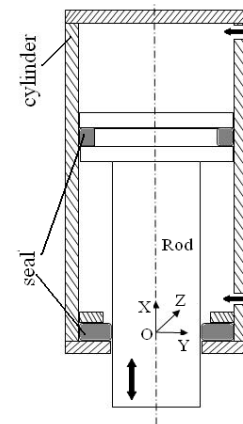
Sketch of the piston pump. Both the rod seal and the ring seal are shown in the figure.
